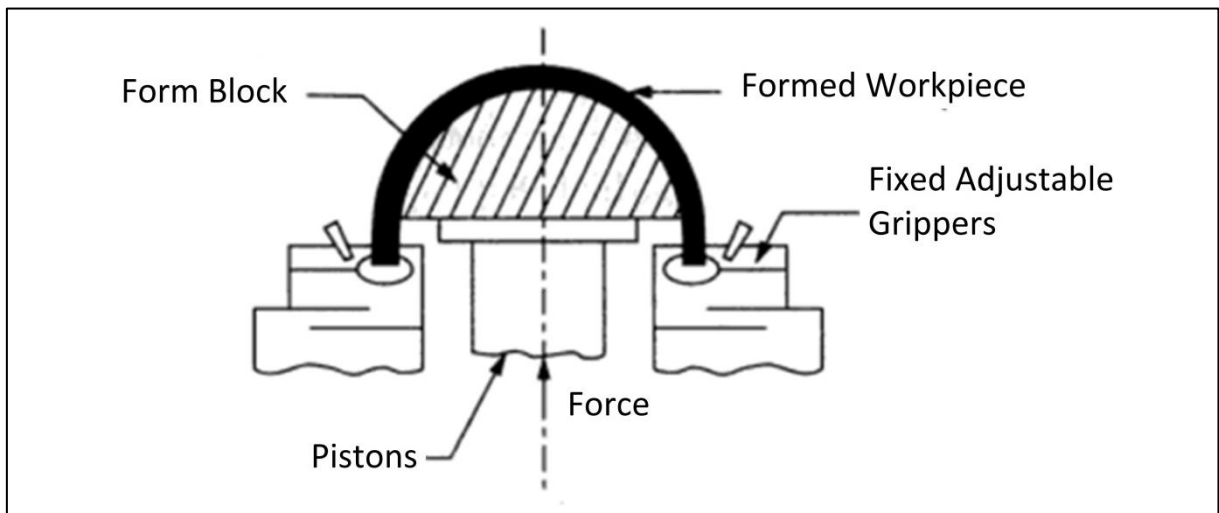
Stretch Forming - Form Block Method⁹⁰
